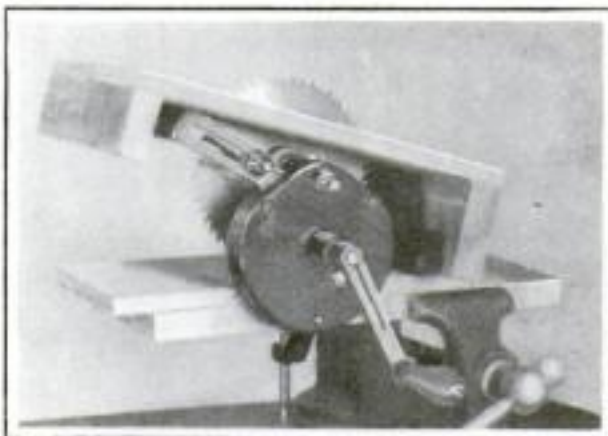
Hand driven saw for cutting and grooving ship model parts and small work
